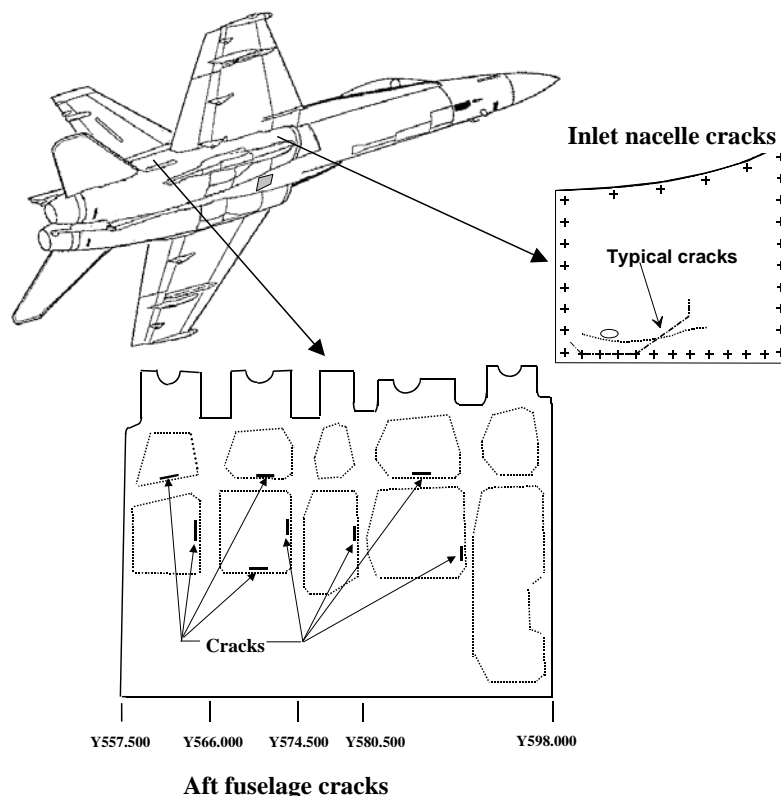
Location of acoustic fatigue cracking in F/A-18 fuselage panels
